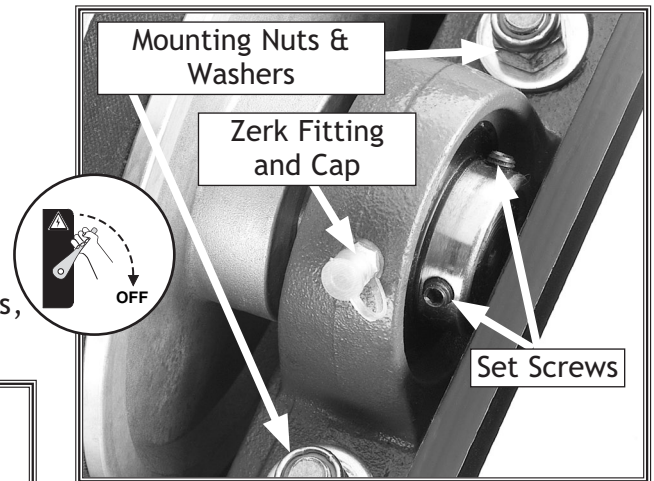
Pillow bearing mounting nuts, washers, and set screws.
